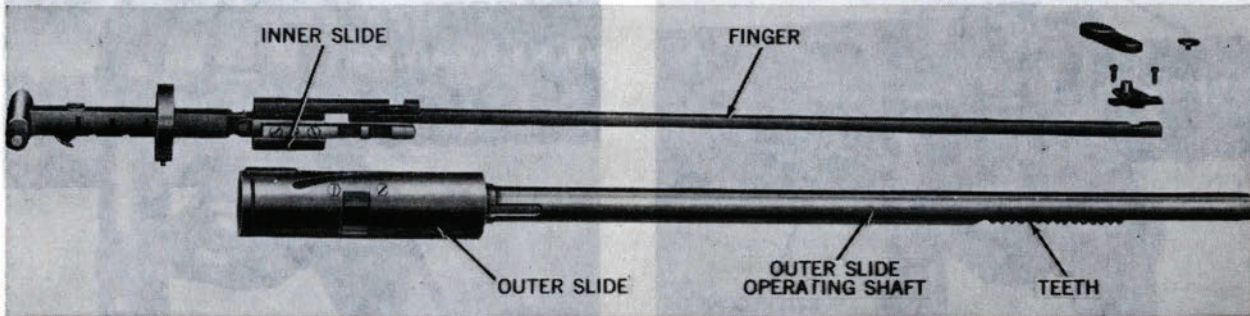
Power-Operated Muzzle Door Mechanism—Operating Assembly Partially Disassembled.
